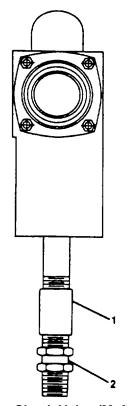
Remove Check Valve (Muffler Exhaust Assembly). 2-346
